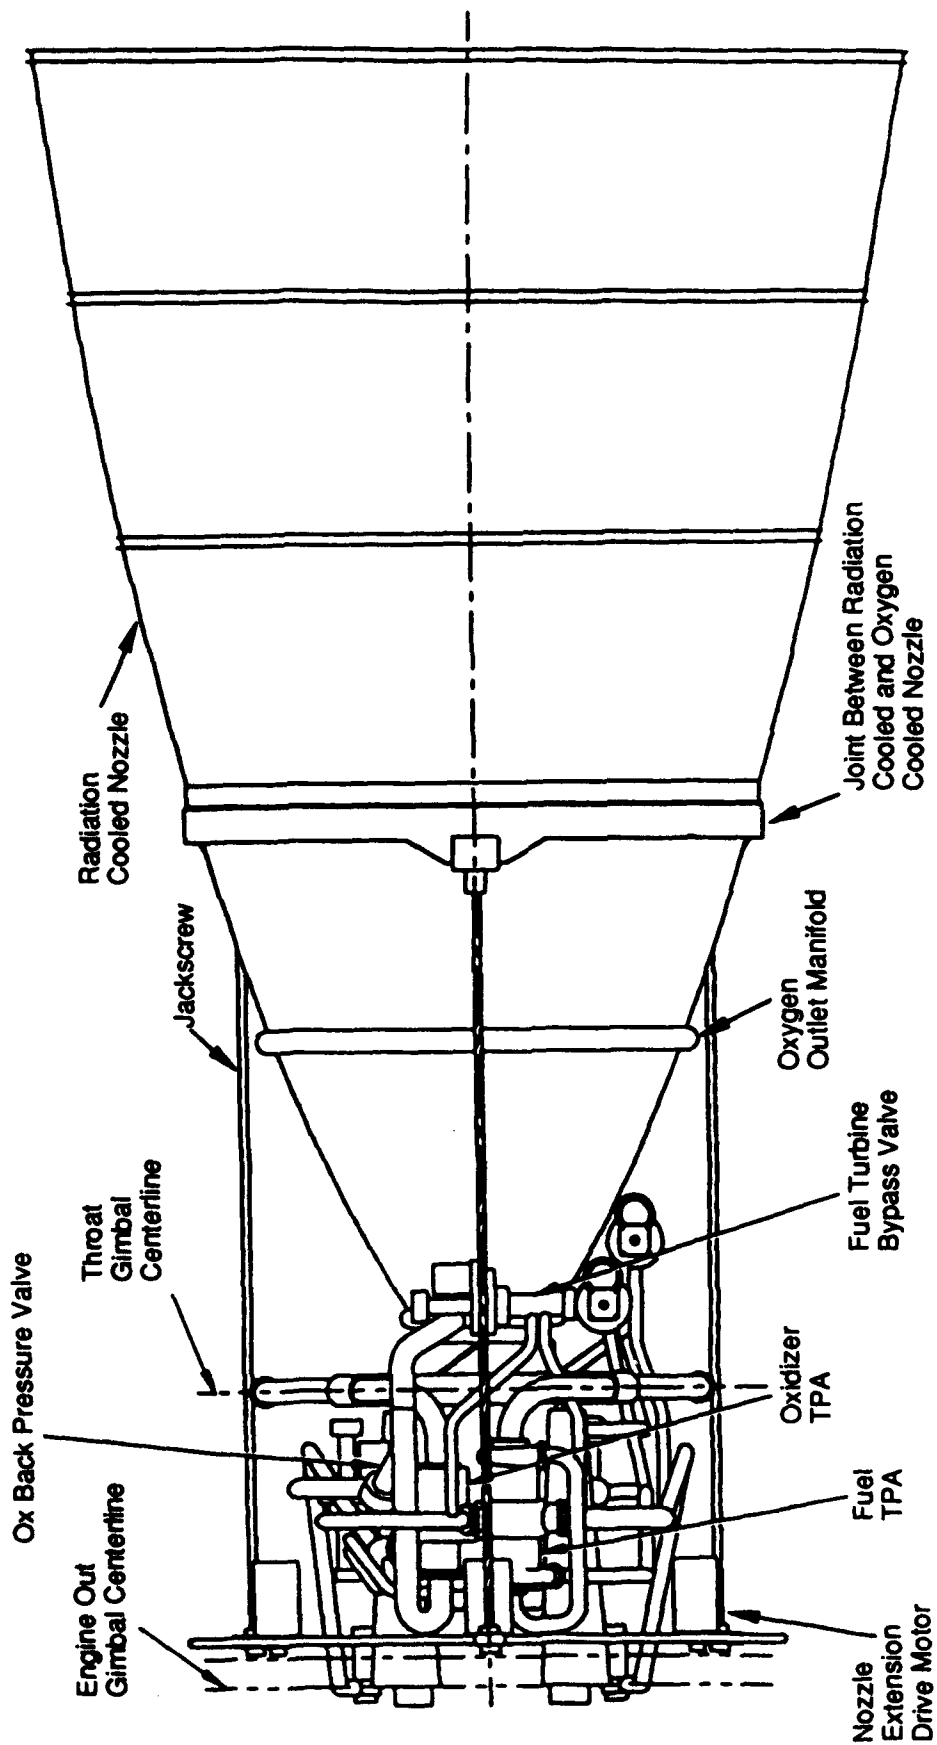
OTV Engine Preliminary Design Layout Drawing - Turbopump Side
